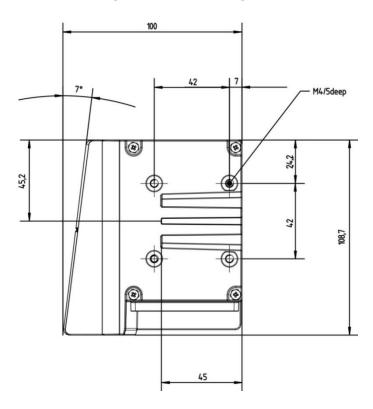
Dimensioned drawing of rear of BE 901 PB
